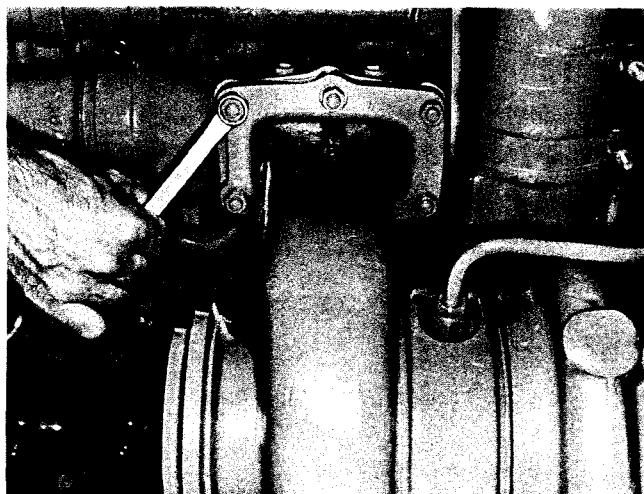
, (N11953). Tightening turbocharger mounting marks
